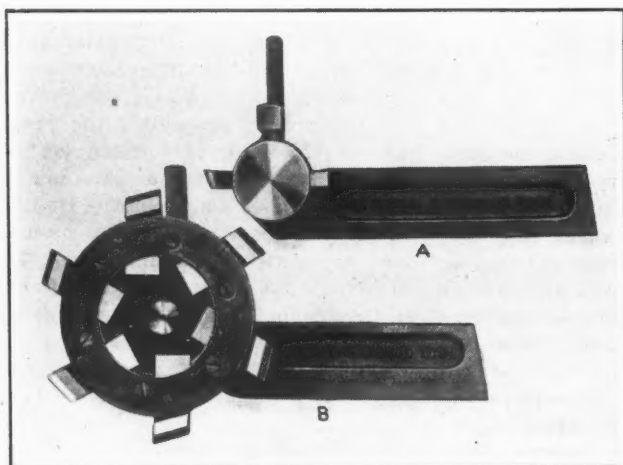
Single-point and Multiplex Threading Tools made by the Cruban Machine & Steel Corporation
